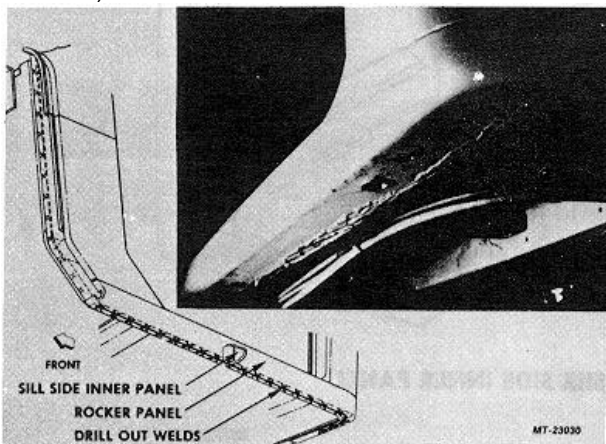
Rocker Panel to Sill-Side Inner Panel Spot Welds
